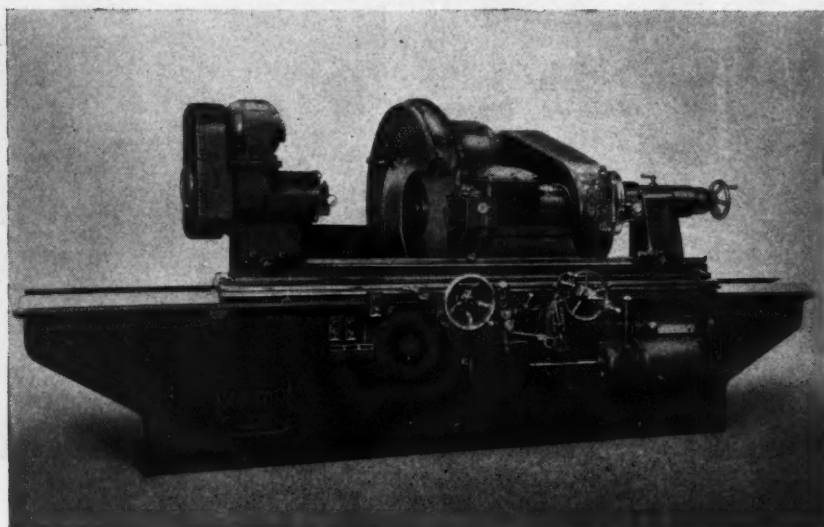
Machine Developed by the Norton Co. for Regrinding Automotive and Diesel-engine Crankshaft Pins and Bearings
